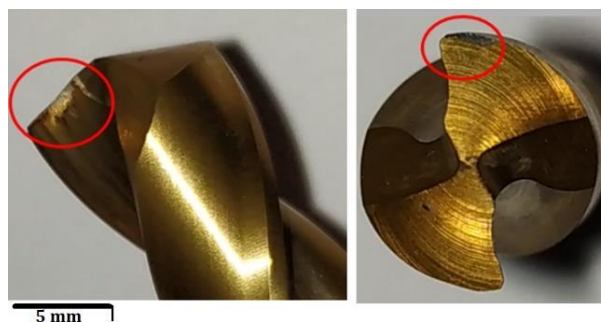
Rake face (left) and margin wear (right) on the tool.
